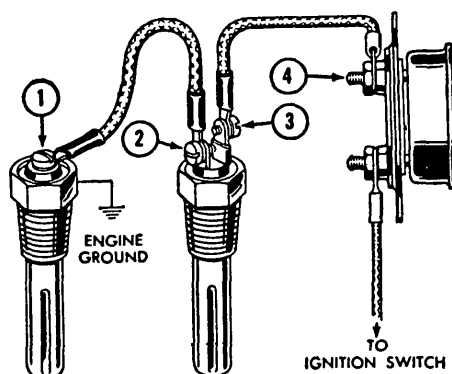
Check points for testing Ford and King-Seeley oil pressure gauges when two engine units are used
